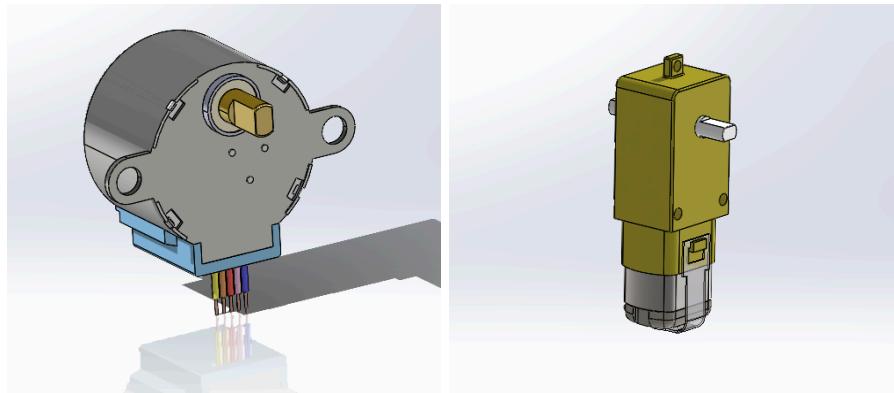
& 35.2: Stepper motor and yellow gearbox motor (respectively)
